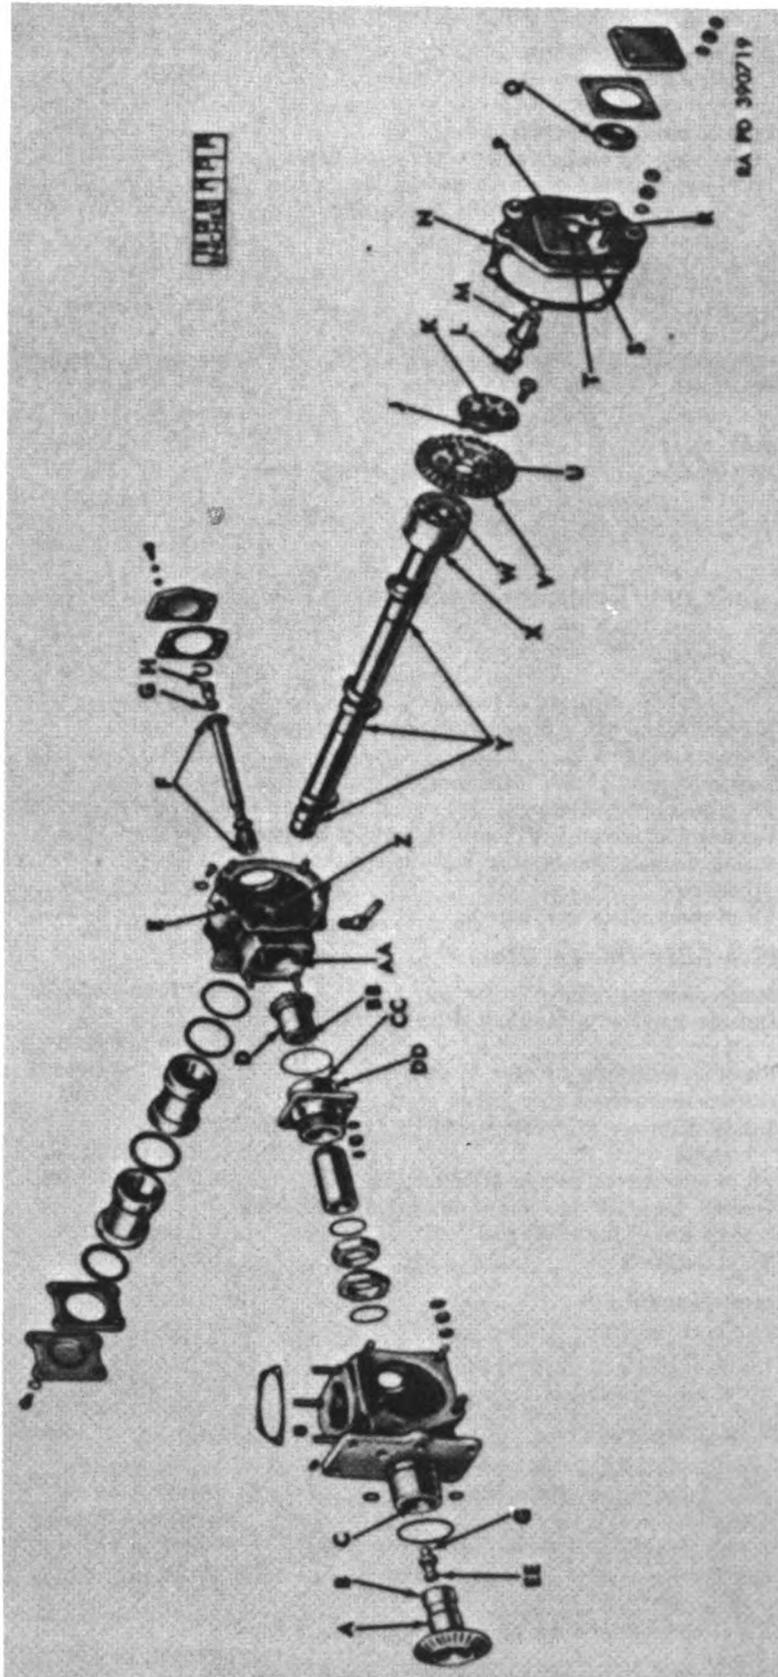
Repair and rebuild standard points of measurement for right camshaft and camshaft drive.
